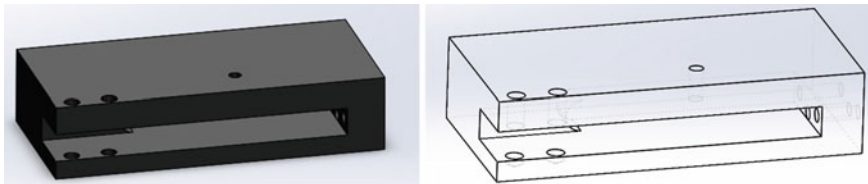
Solid and wireframe view for tool housing (Design 4)
